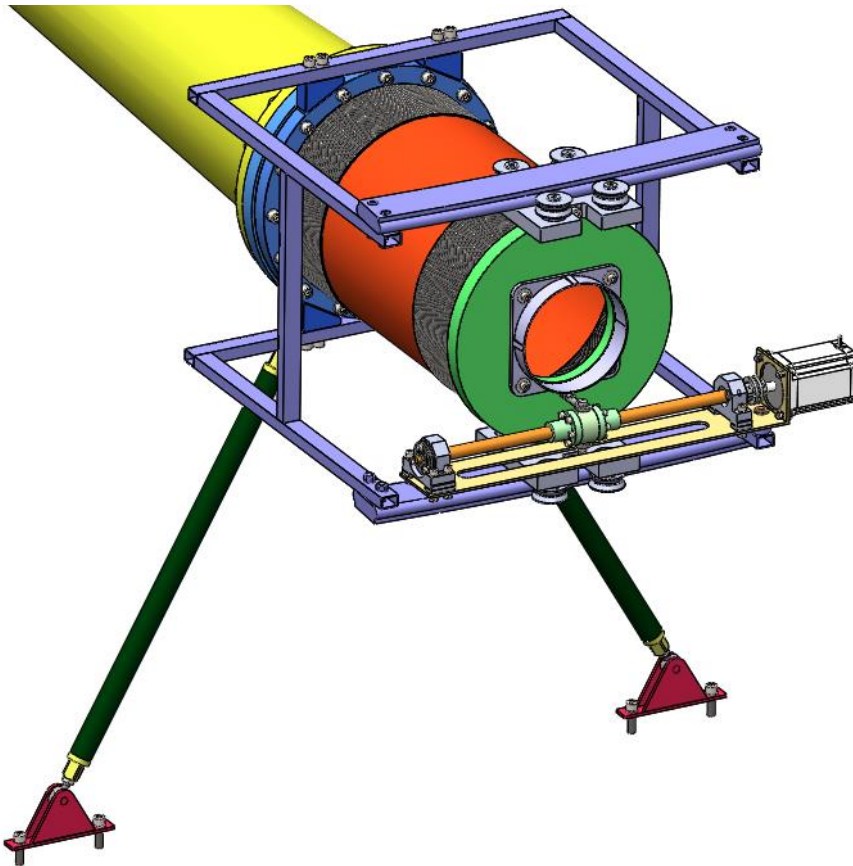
Bellows weldment with rolling system in 0° position
